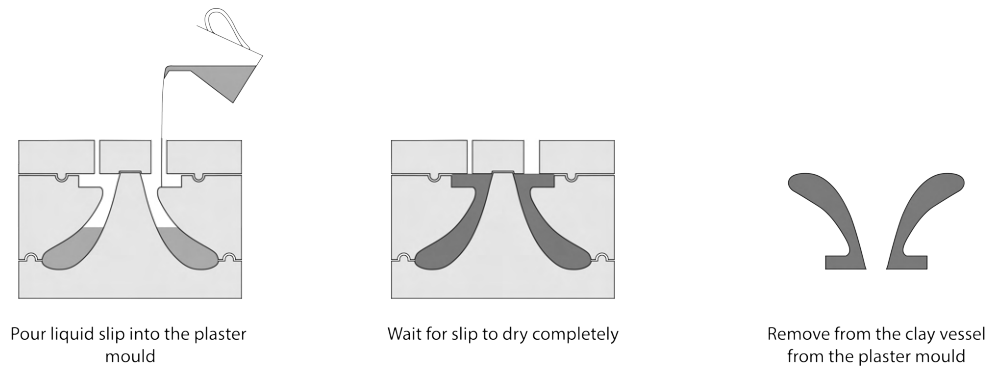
Solid casting process using a multi-part mould with an internal core.
